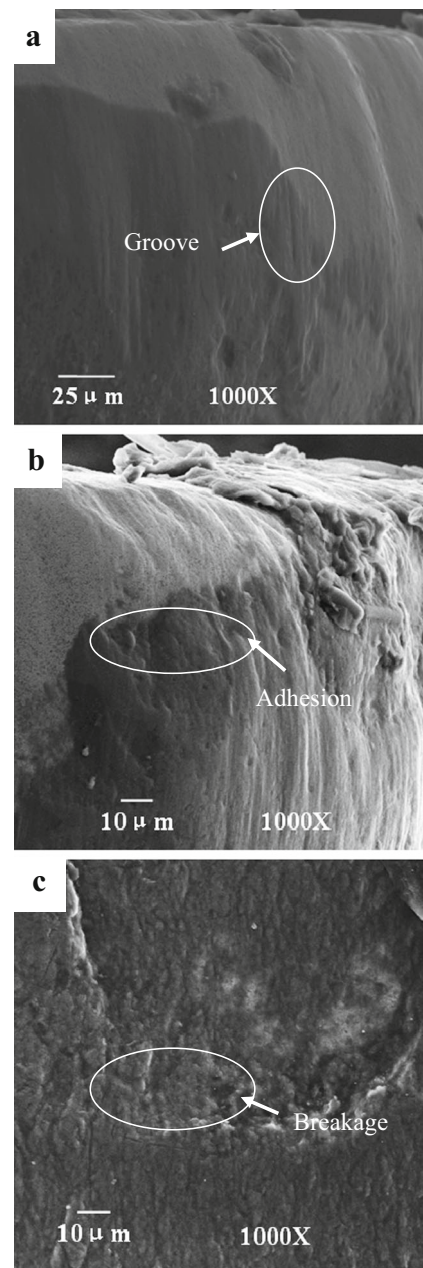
Tool wear morphologies of carbide tool: a groove, b adhesion, c breakage
